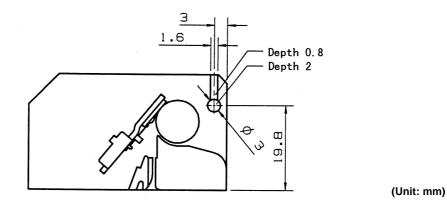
Mounting holes for the Paper Catch Protection Cover
